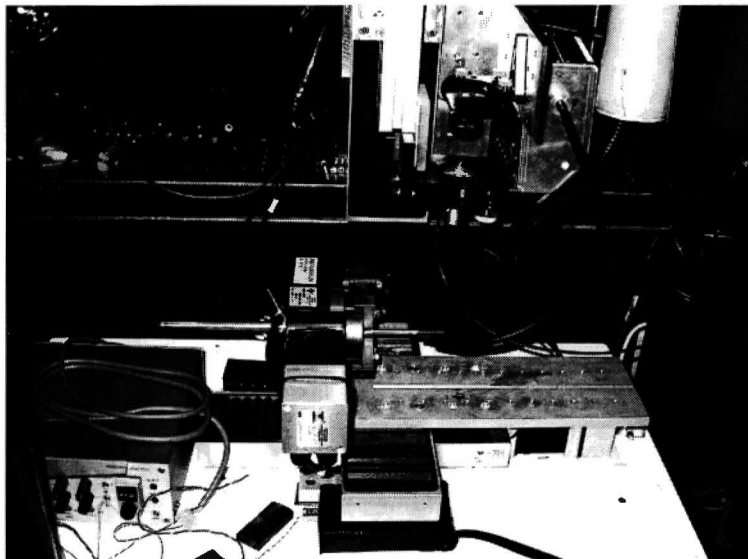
The laser cutting equipment used for the fabrication of designed actuator
